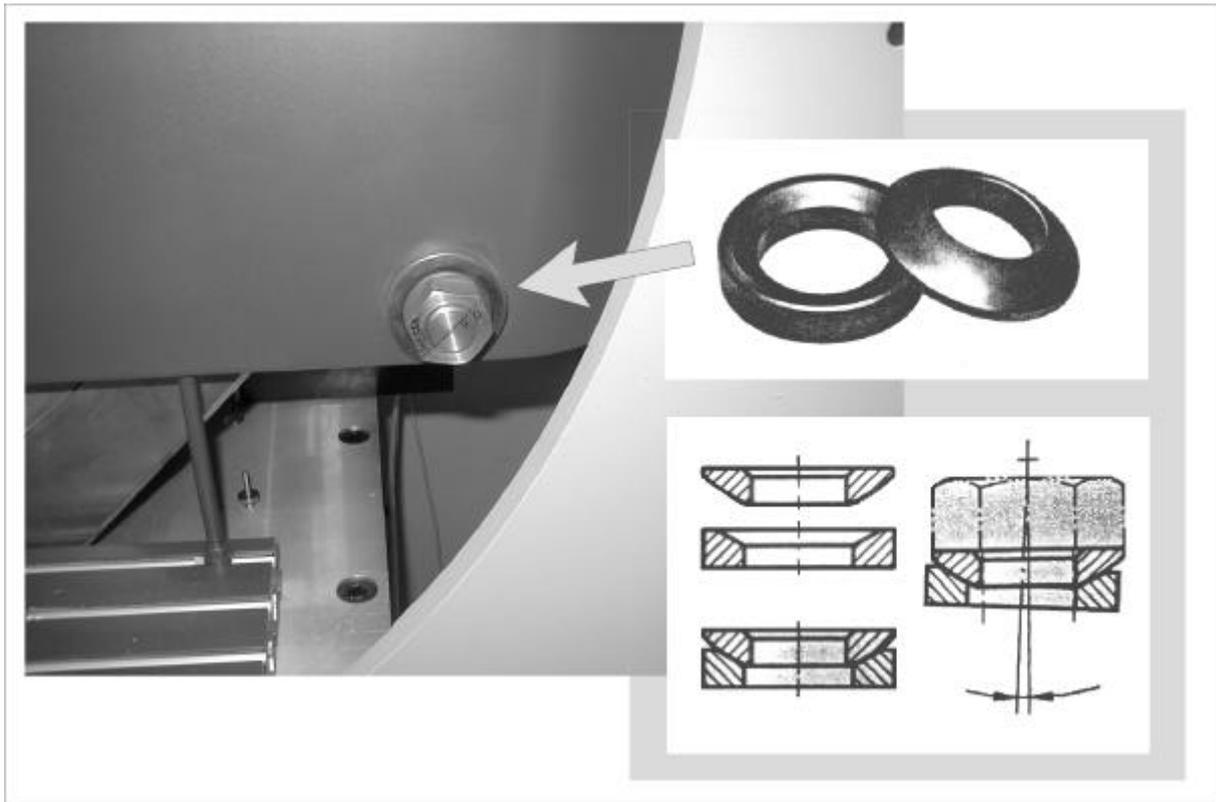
Spherical washers and pans: working principle and use in the machine [3]
